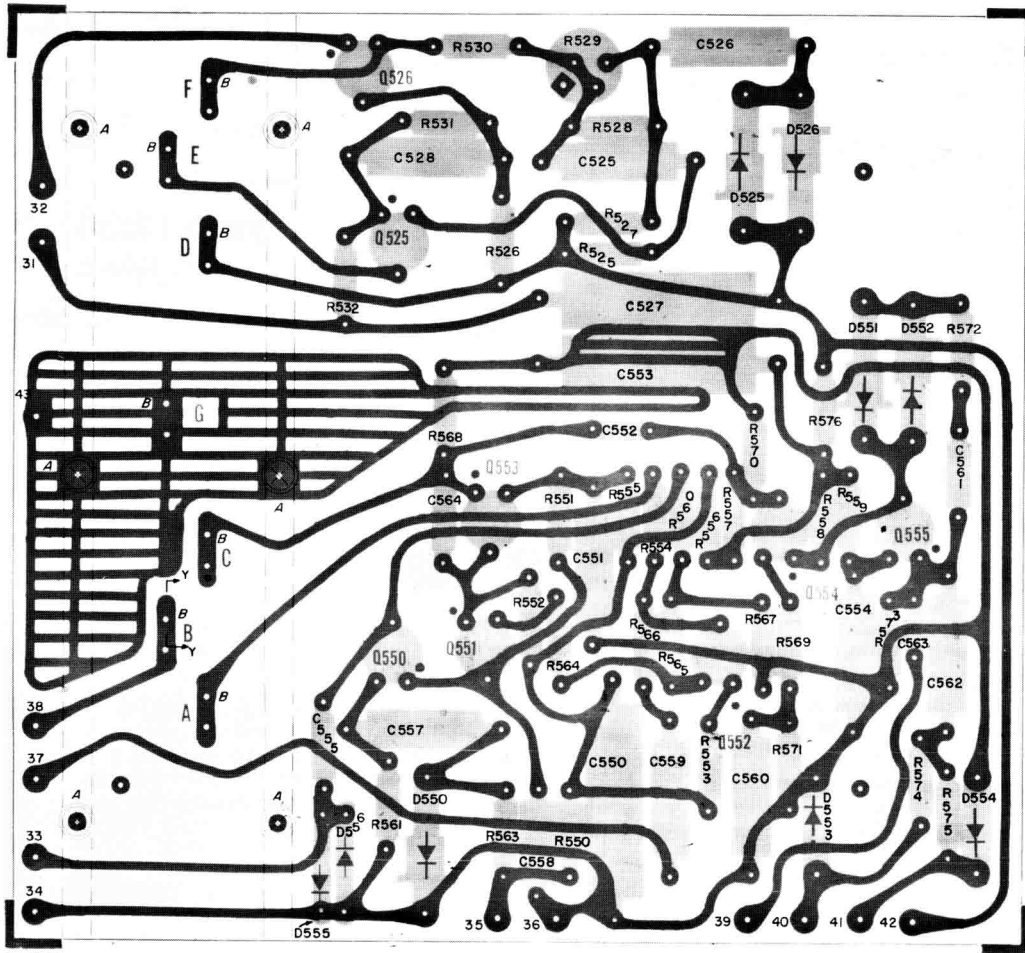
Etched-circuit board assembly, oscillator and detector (P/N 1608-2722).
